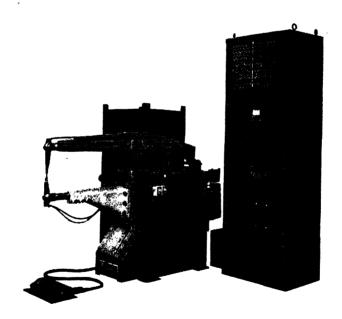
A capacitator spot welder for aluminum alloys
